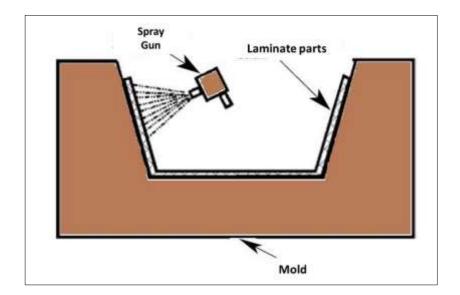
Spray molding - production scheme by spraying technique [34].
